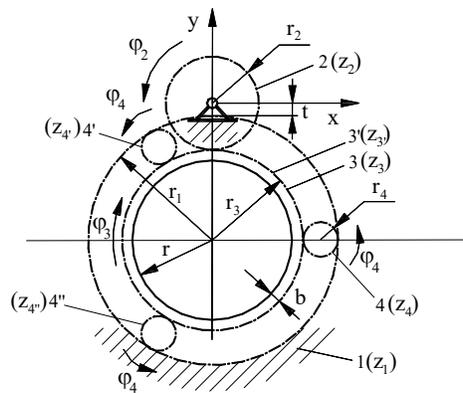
Geometric synthesis of the gear mechanism used to drive the cubit-radial joint
